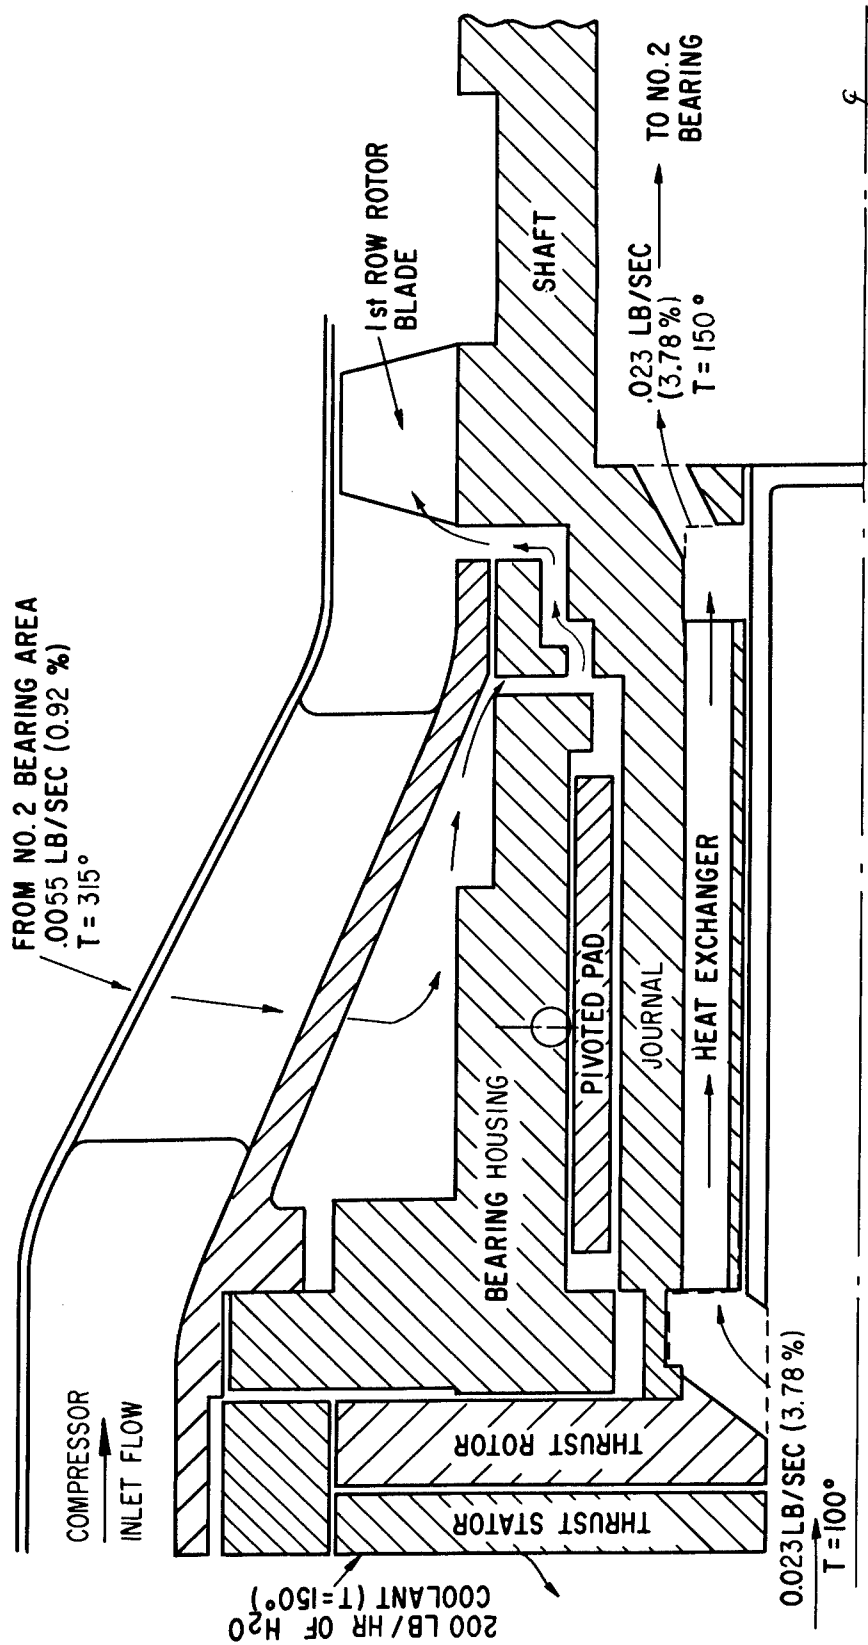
Argon Cooling Gas Flow Diagram For The Initial Design Of The No. 1 Journal Bearing And Thrust Bearing
